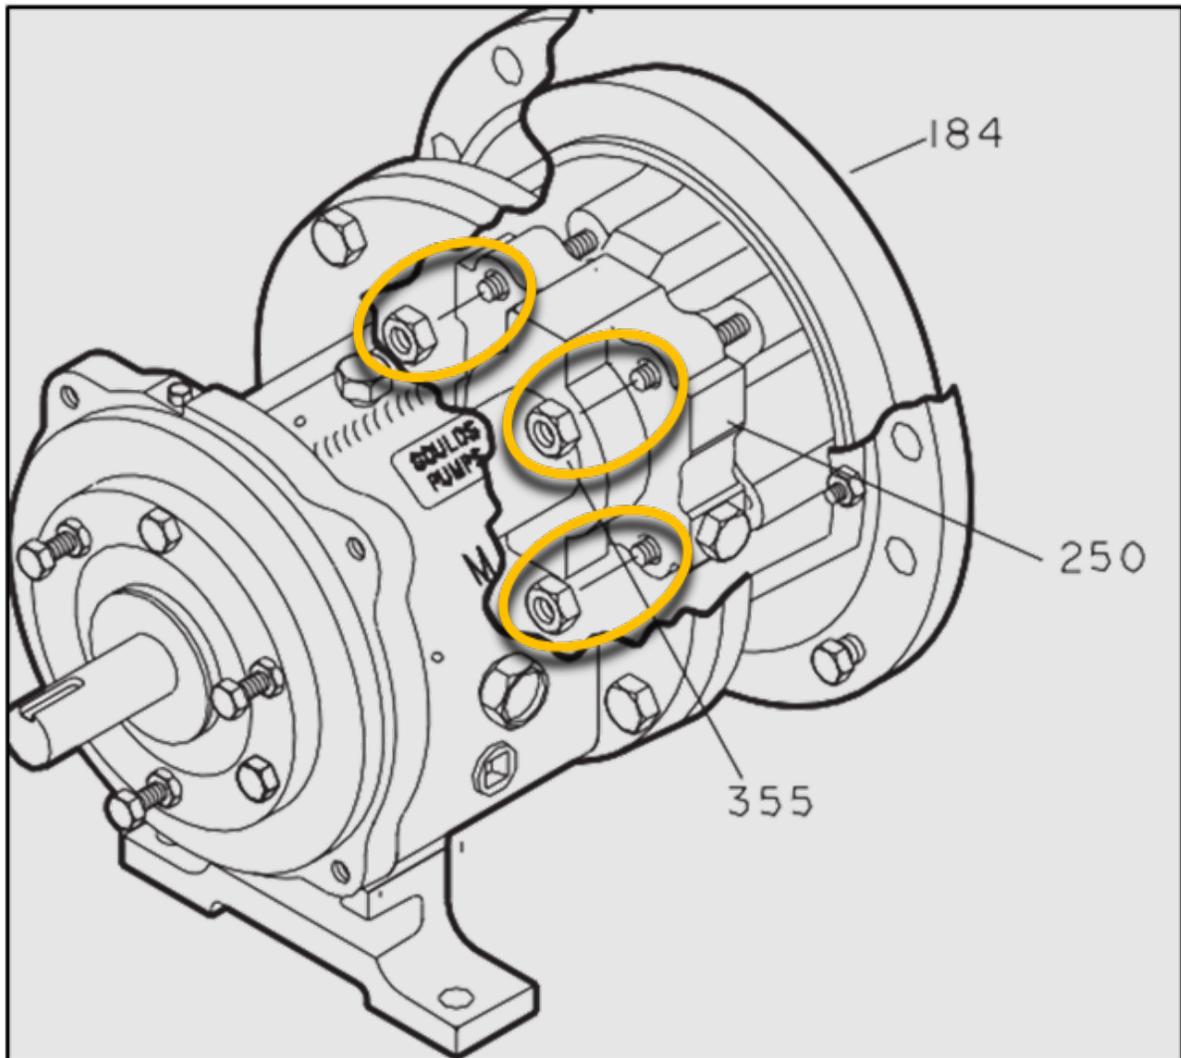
Cutaway drawing of *Goulds* chemical process pump showing the locations of three of the four gland nuts that held the seal gland in place against the seal chamber cover. *Note: fourth gland nut is not visible in drawing.* [Credit: *Goulds*, annotations by CSB]
